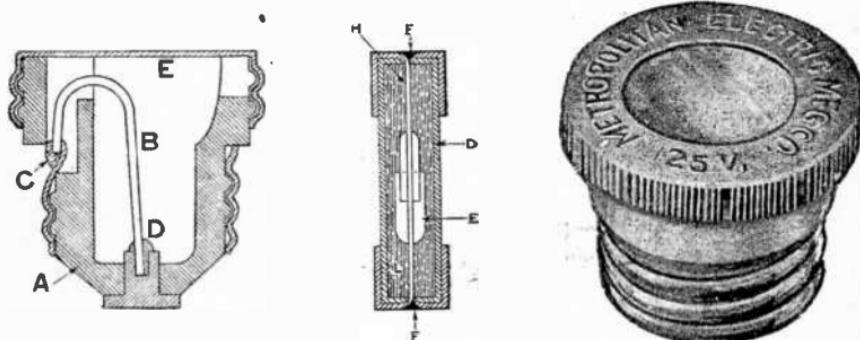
,093.—Section of Edison type plug fuse construction. *It consists of a cylindrical porcelain body A, in which the fuse strip B, is placed. One end C, of the strip is soldered to the screw shell which surrounds the body and which forms one of the contacts. The other end D, of the strip is soldered to the center contact in the bottom. The top cover is spun in place on the body and is fitted with a mica window E, by which it is possible to tell at once when a fuse on the circuit has blown, as the blowing discolors this window. These plugs screw into the receptacles on the fuse block and, whenever a fuse blows, a new plug must be inserted. Standard plug fuses are intended for the protection of circuits having a maximum current of 30 amperes.
